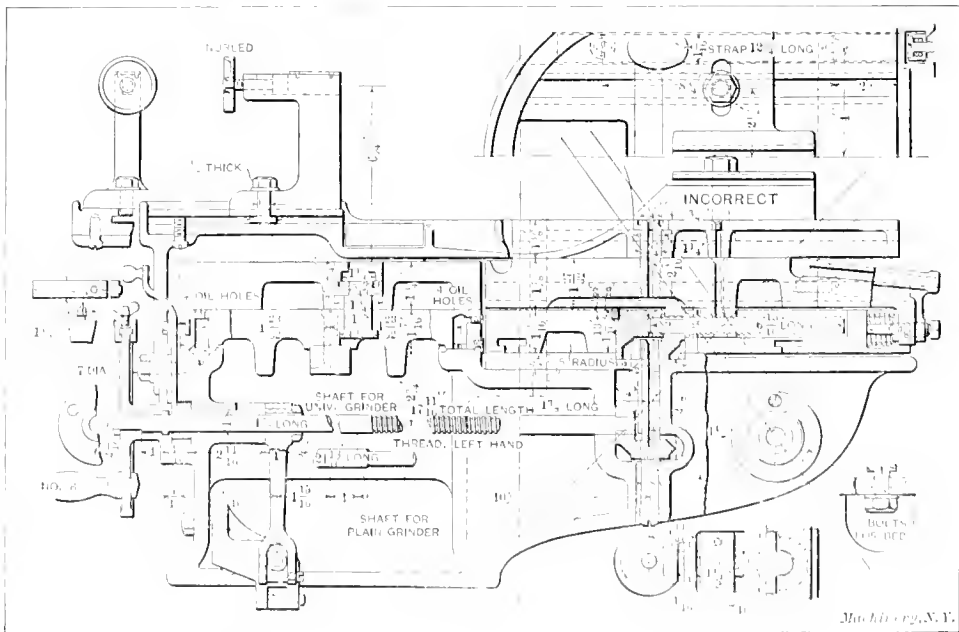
Part of Drawing made in 1874 of Grinding Machine with Swiveling Wheel Stand
